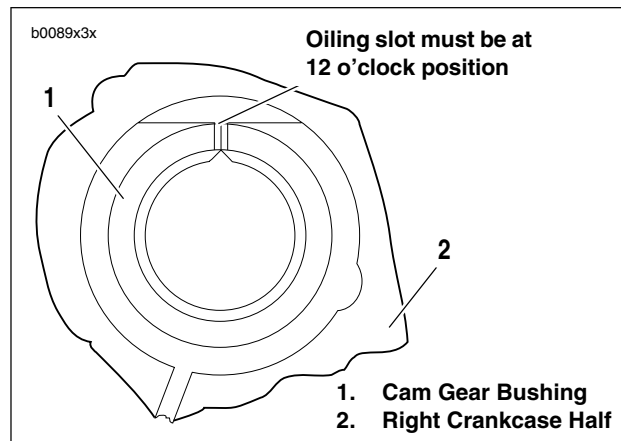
Cam Gear Bushing Installed in Crankcase
